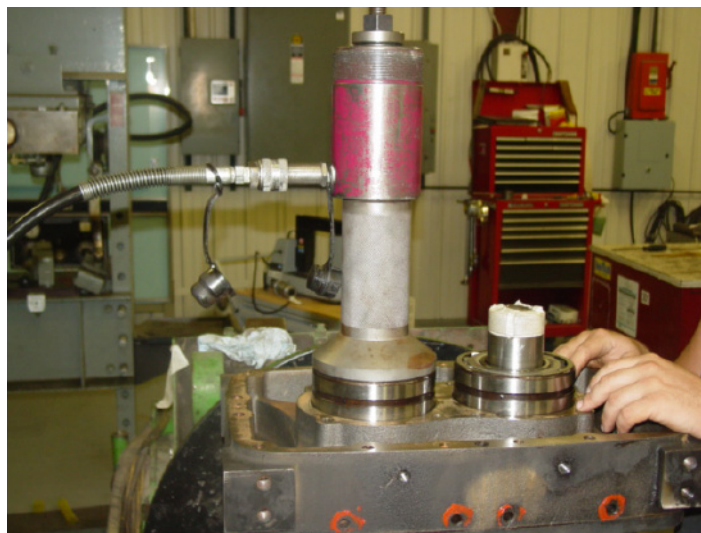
ATTACH HYDRAULIC CYLINDER HOSE
